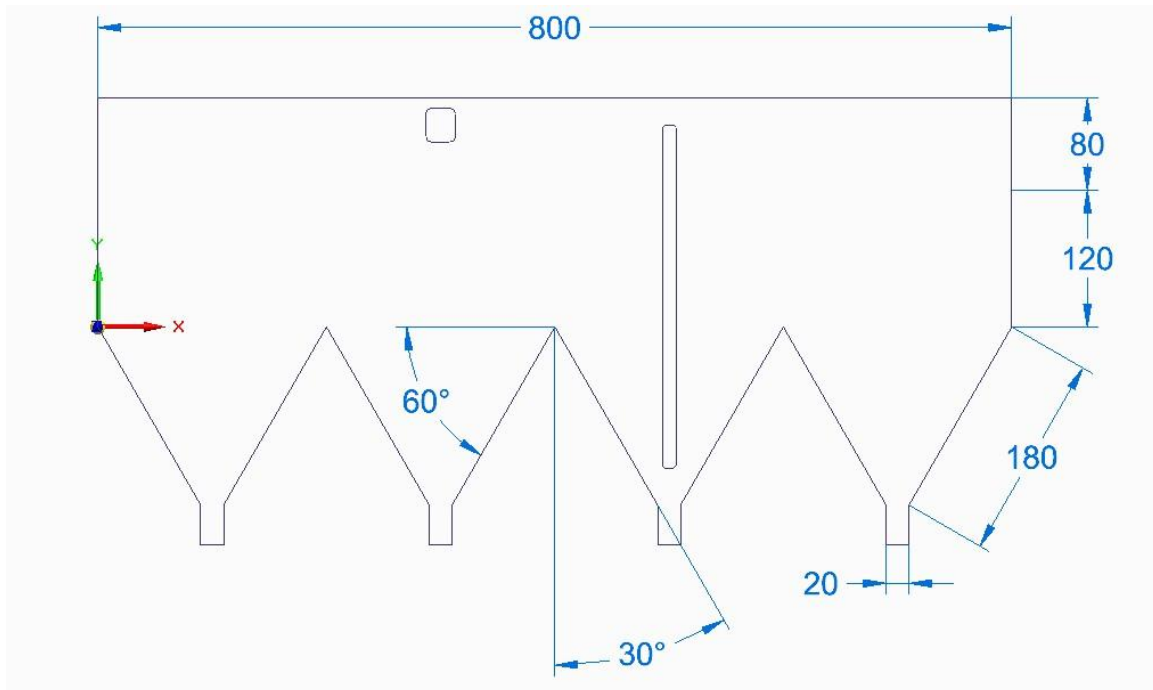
CAD Design of Hopper Geometry with Dimensions
